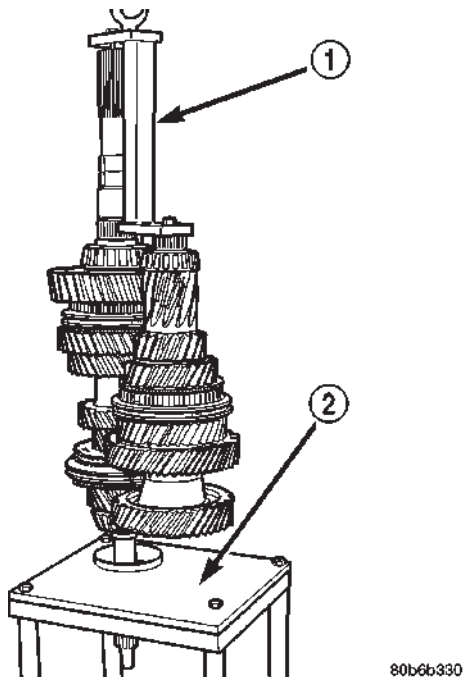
LIFT GEARTRAIN WITH ENGINE CRANE
